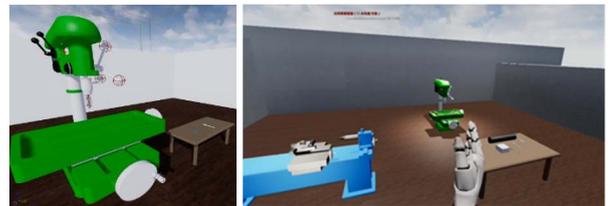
Virtual drilling machine with cross table and virtual lathe operating platform
